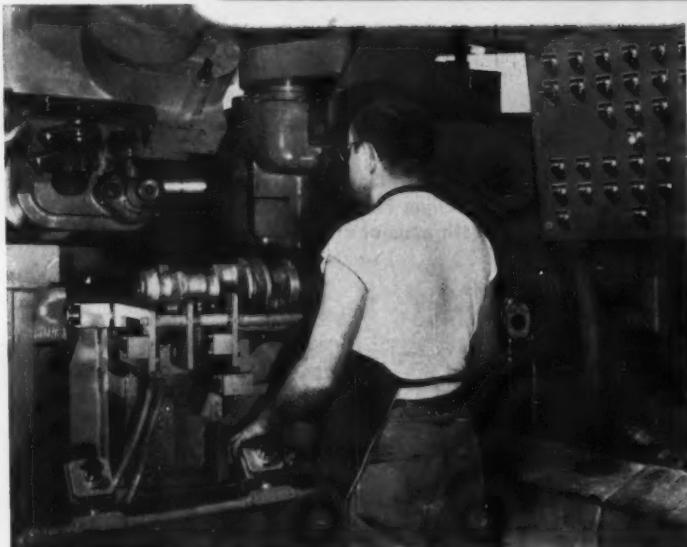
(Left) A total of eight locating and driving notches are cut in each V-6 engine crankshaft on this milling machine. Cutters are at upper left.
